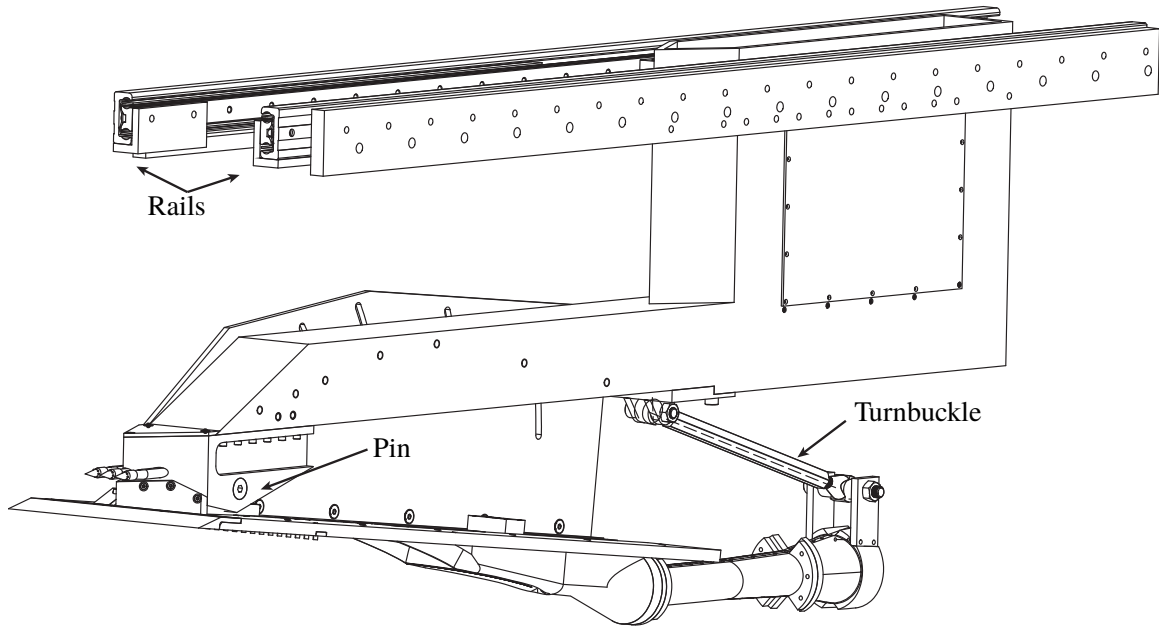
Scramjet engine variable-angle-of-attack mount. The nearest side-plate and the back-shielding have been removed from the picture to facilitate inspection of the assembly.
